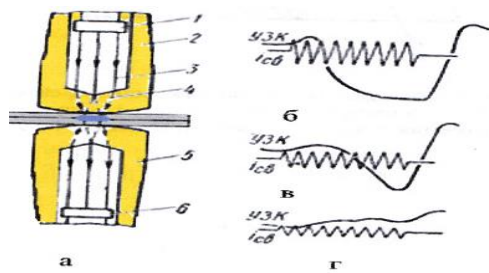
Spot weld testing by ultrasonic shadow method.
